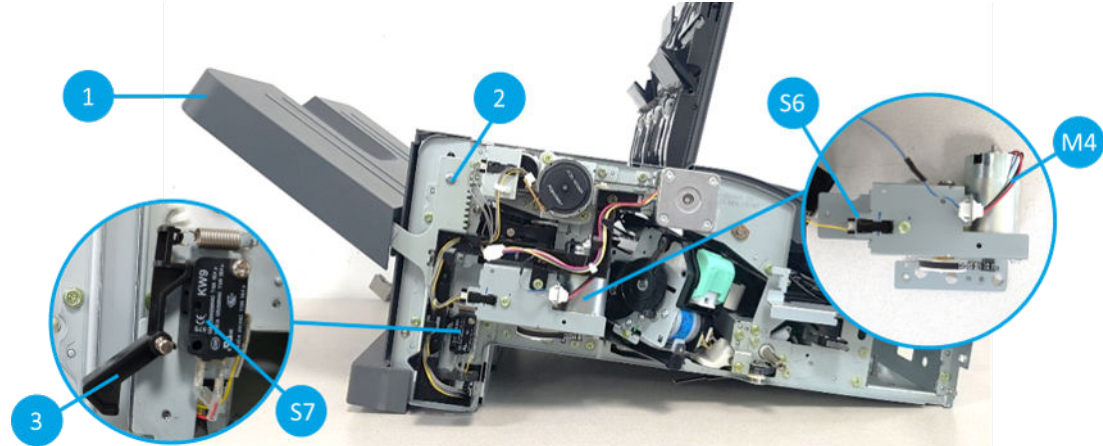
Inner finisher system - output tray unit detail view (2/2)
